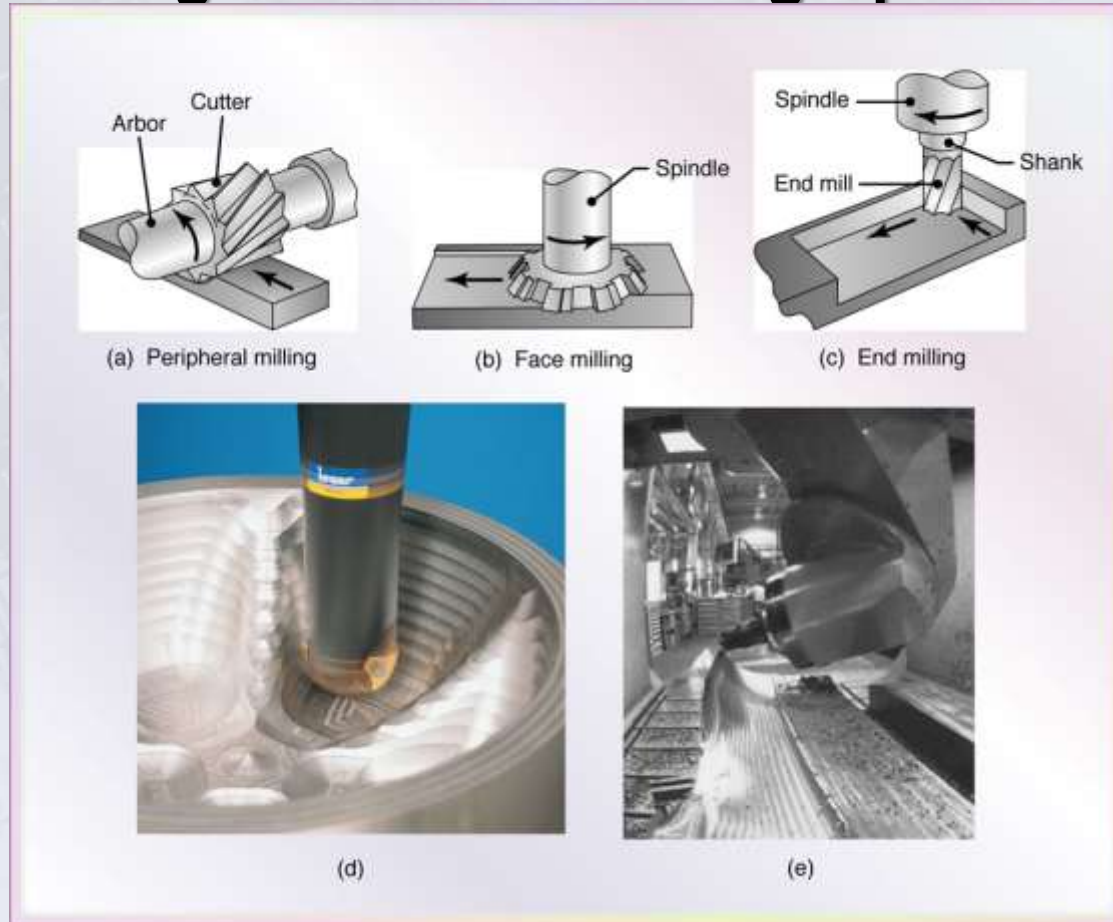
Some basic types of milling cutters and milling operations. (a) Peripheral milling. (b) Face milling. (c) End milling. (d) Ball-end mill with indexable coated-carbide inserts machining a cavity in a die block. (e) Milling a sculptured surface with an end mill, using a five-axis numerical control machine. *Source:* (d) Courtesy of Iscar. (e) Courtesy of The Ingersoll Milling Machine Co.
